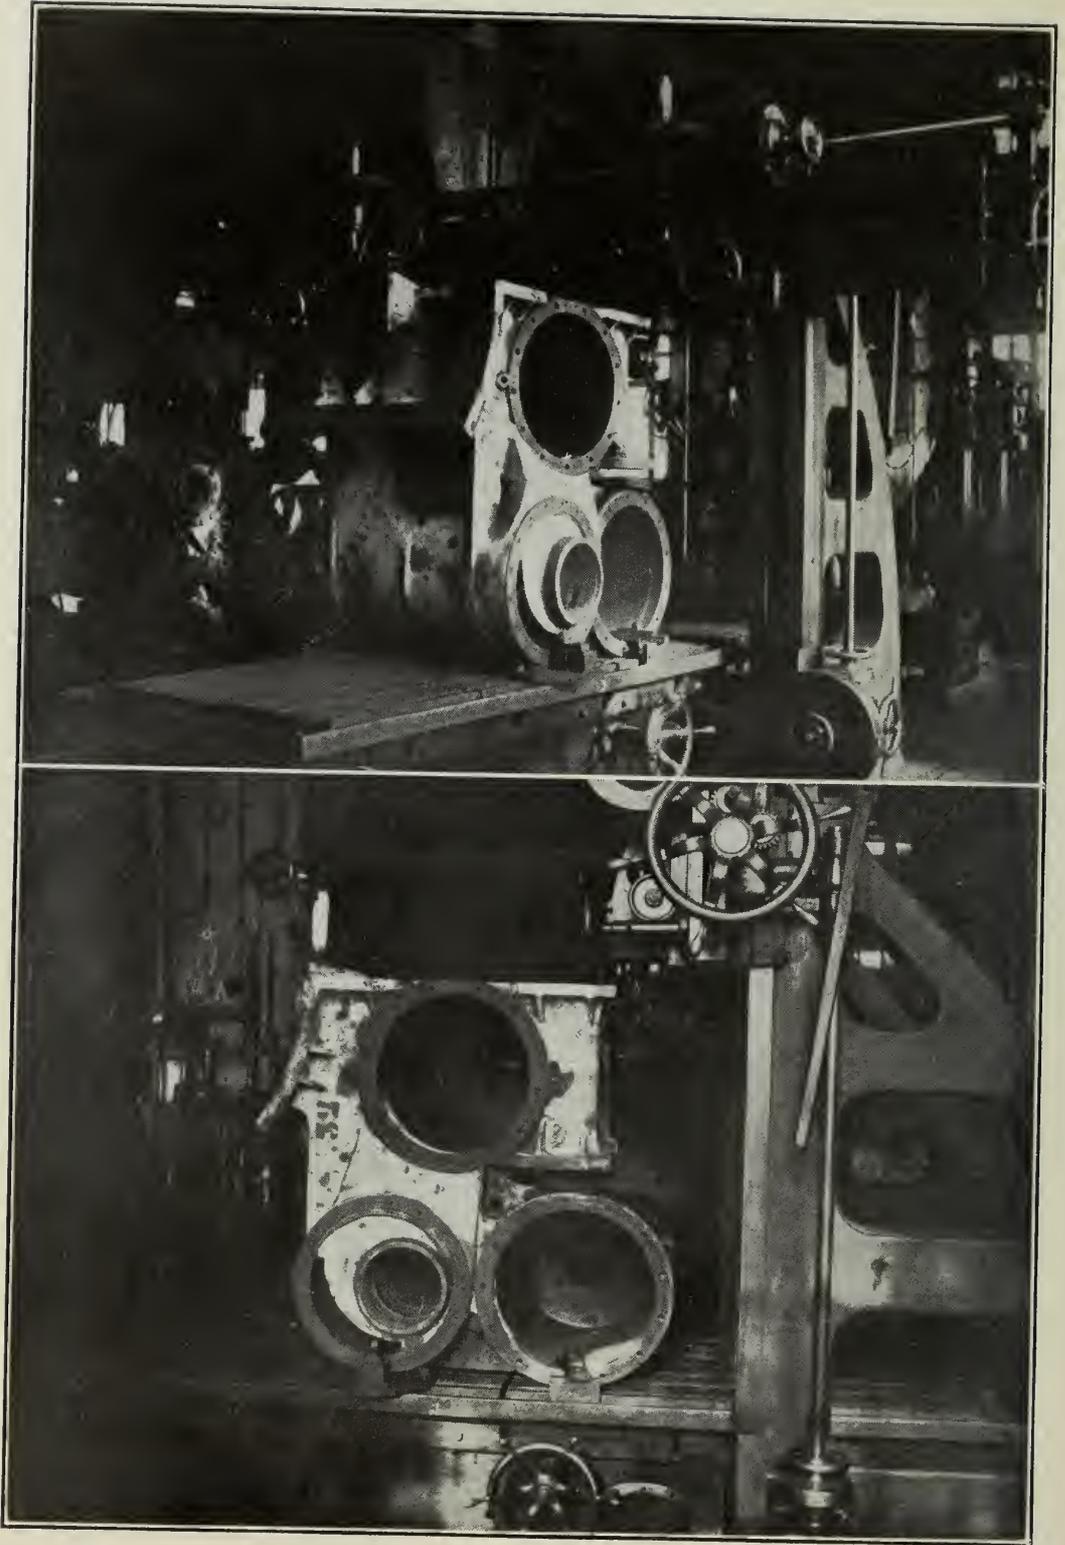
MILLING ENDS OF CYLINDER FLANGES.
